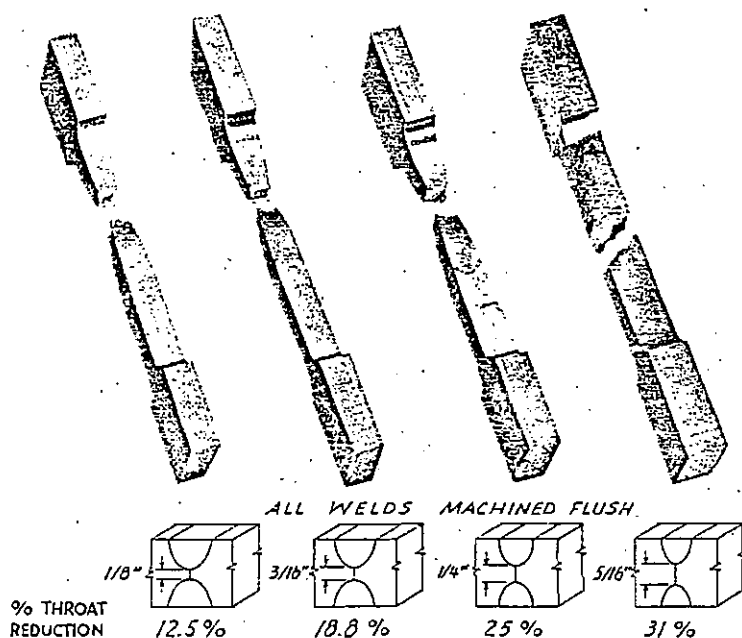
Weld samples were made, with varying degrees of lack of fusion, as reduced-section tensile specimens. Welds were machined flush before testing, and weld failure did not occur until the unpenetrated throat dimension had reached 31% of the total joint throat.
